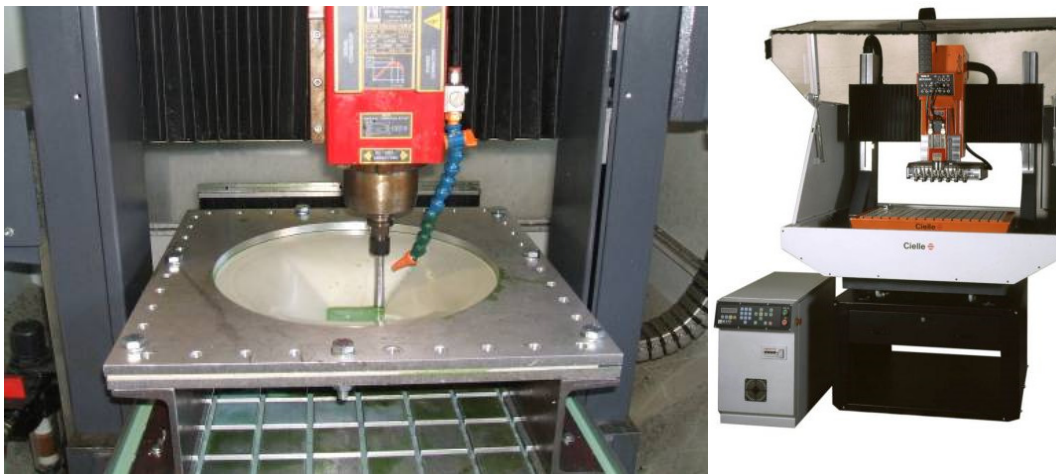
CIELLE CNC machine using for SPIF process with polymeric materials
